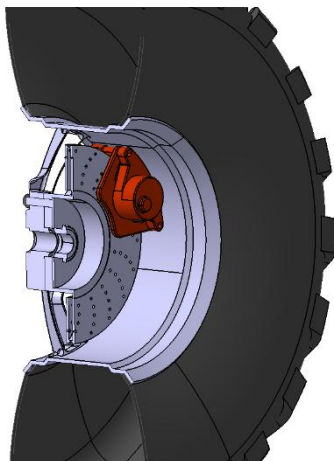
Sectional view of the conventional wheel-end illustrating internal packaging
